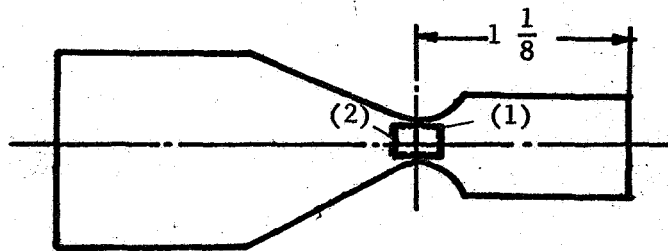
D. Locations of Cemented Strain Gages on Cantilever Specimens
